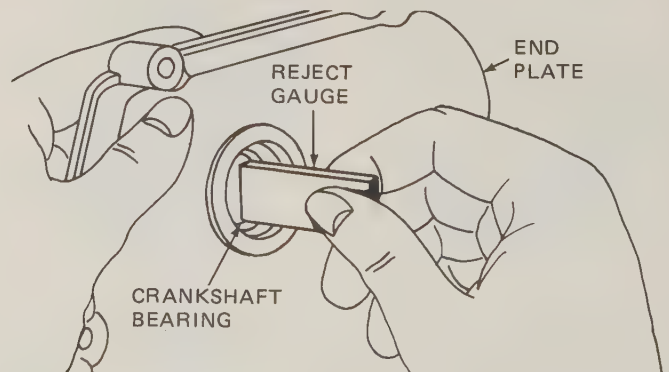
Use a reject gauge to check the wear of a sleeve-type crankshaft bearing.
